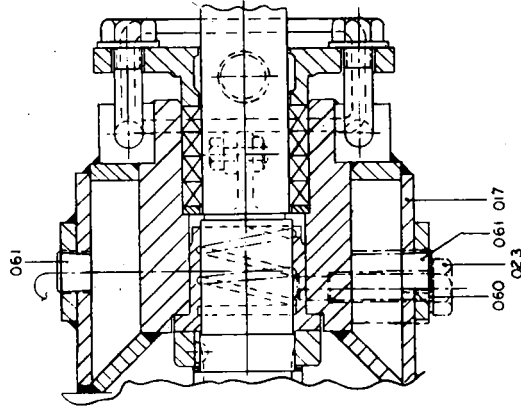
VIEW OF PACKING PUMP, FABRICATED PACKING BOX COVER WITH STEAM JACKET
